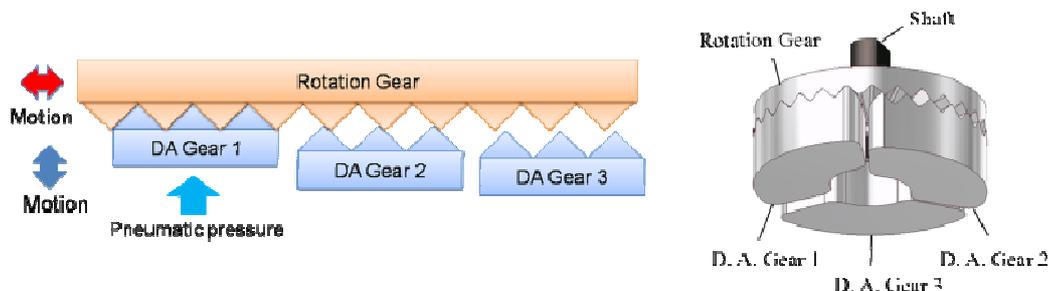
Rotation gear and Direct Acting (DA) gears in pneumatic stepping actuator; (Left): Motion principle 2D schematic representation; (Right): Main components of stepping actuation; These
